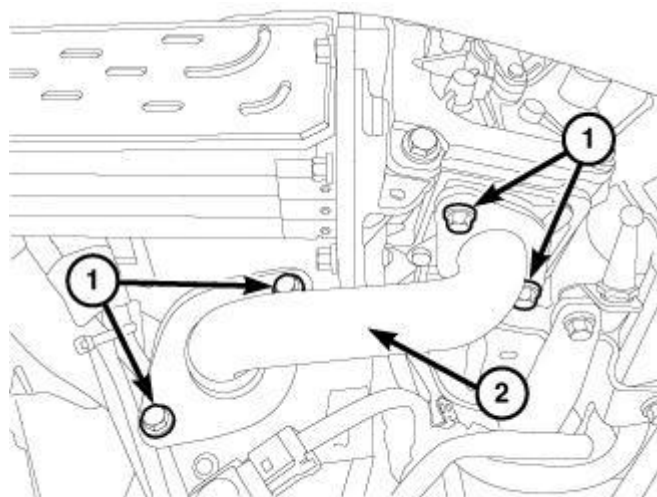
EGR Tube Gasket Onto Mixing Chamber
